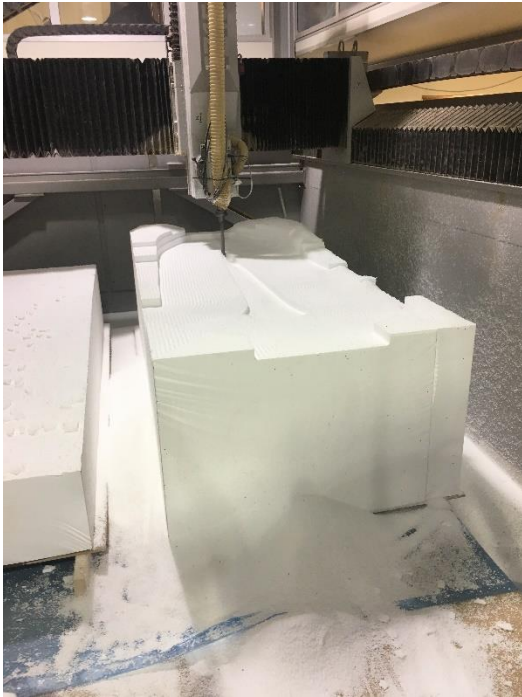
Production of moulds at Eker design. Epoxy paste is used to give the moulds a hard surface
